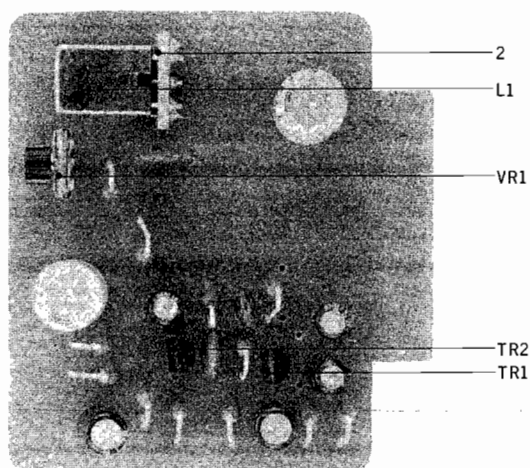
PHOTO OF REC. AMP. P.C. BOARD (KD-A5207)
